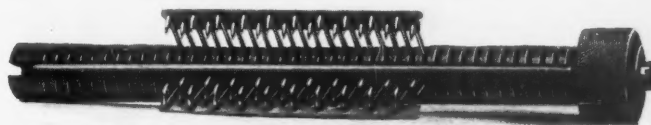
Removable Holder for "Bulldog" Lacers Ready to be put into Closing Machine
